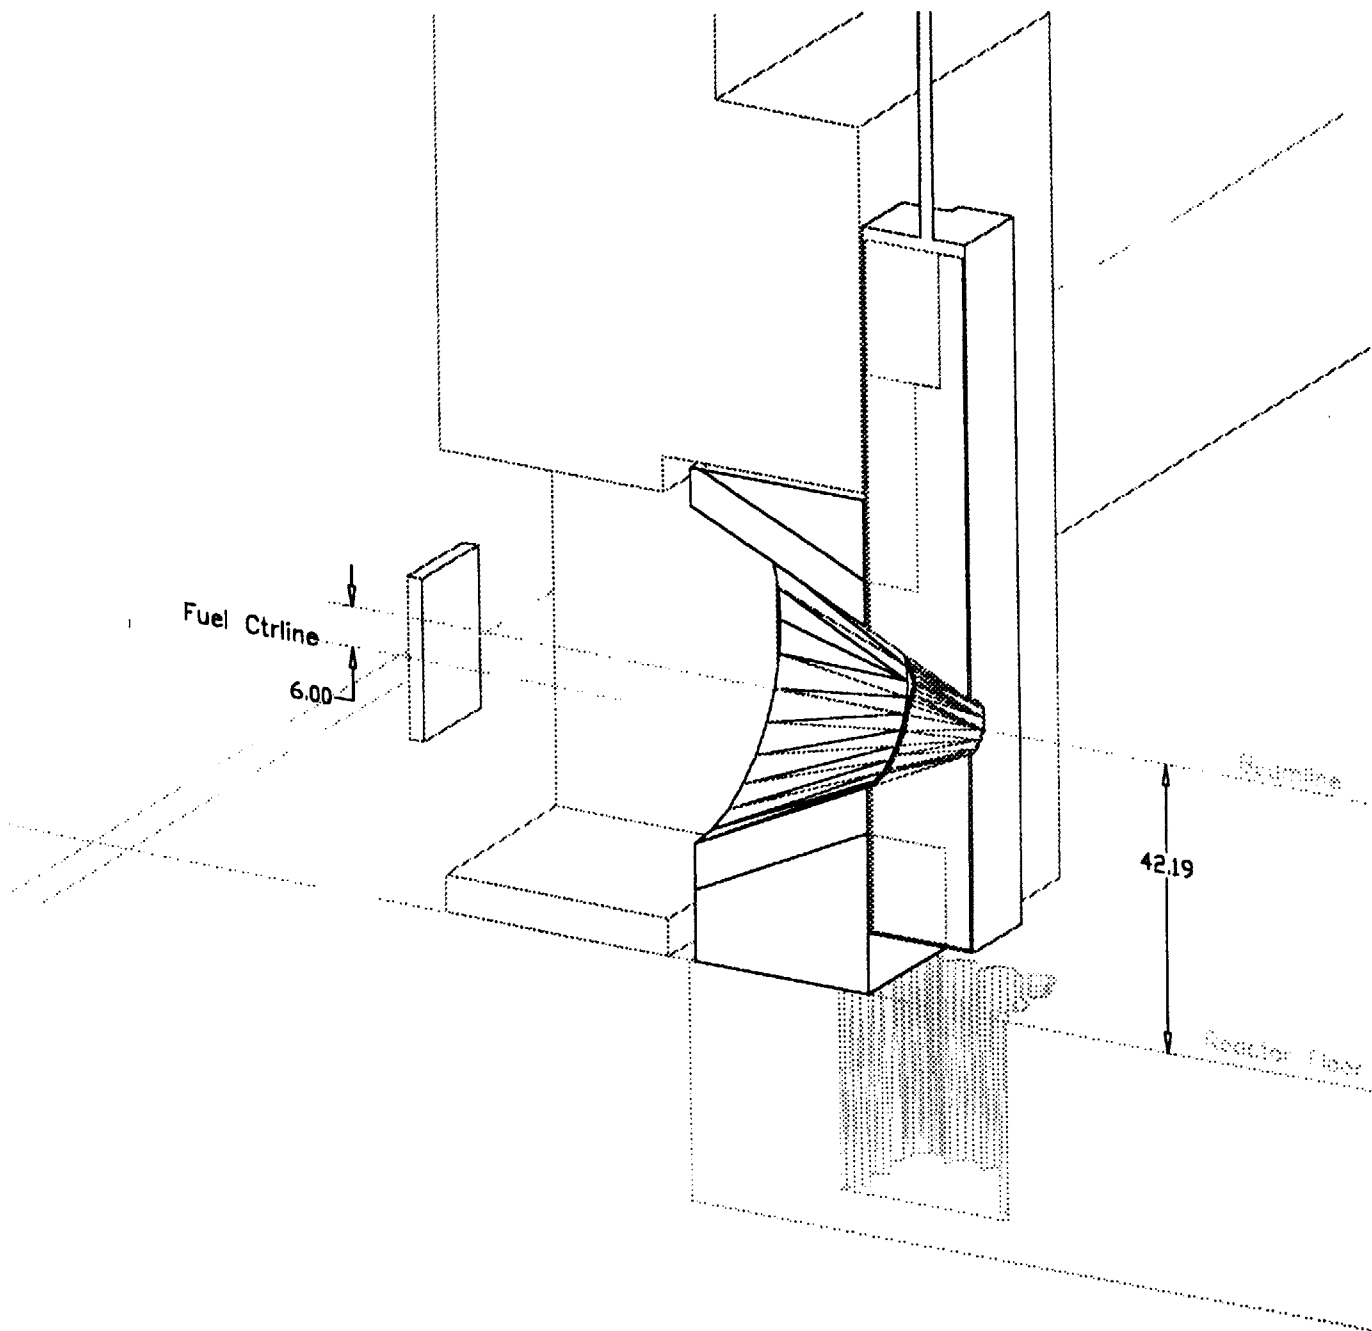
Open Fast Shutter Showing Floor Hole.
